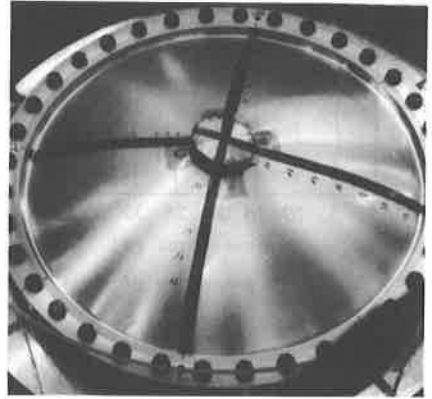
Membrane with reinforcement, failed at 28 bar.
